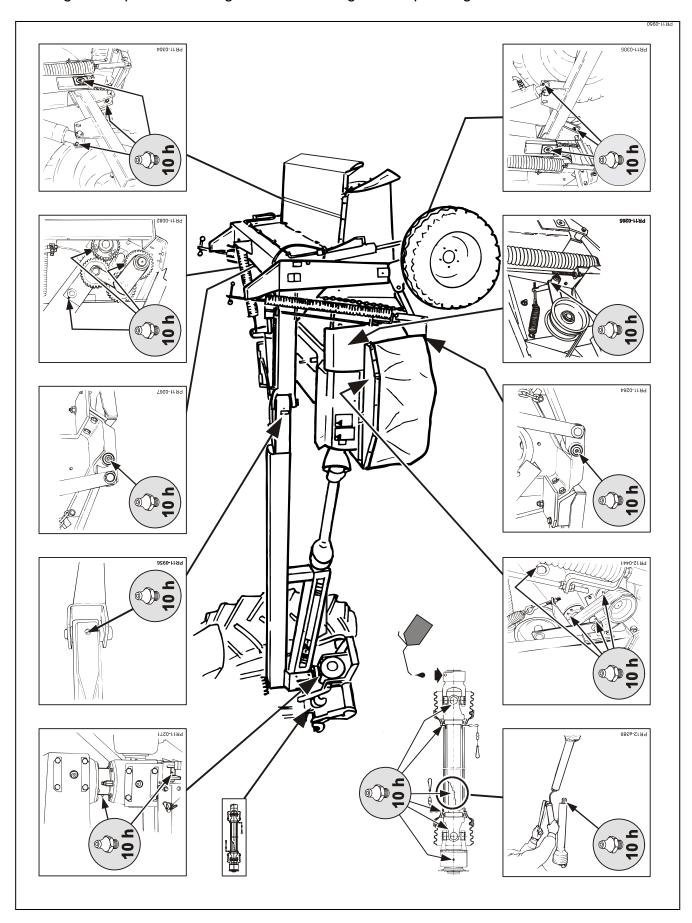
This especially goes for the main PTO drive shaft and the traversing PTO drive shaft that operates the bevel gearbox above the cutter bar.
